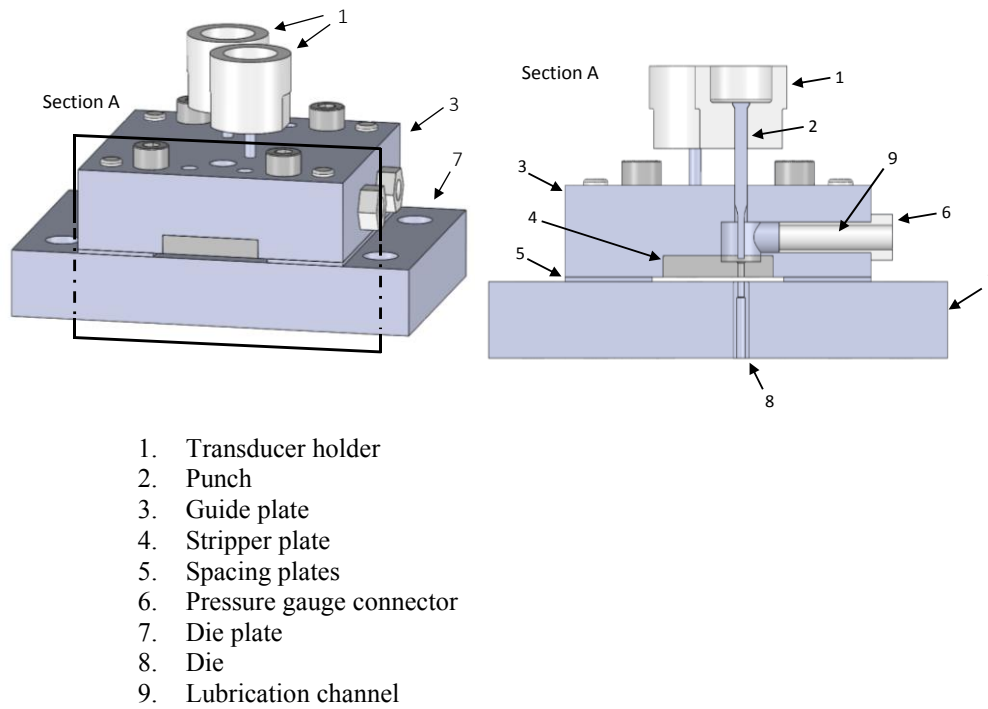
Schematic illustration of the punching tool with a cross-sectional view of the main tool components.
